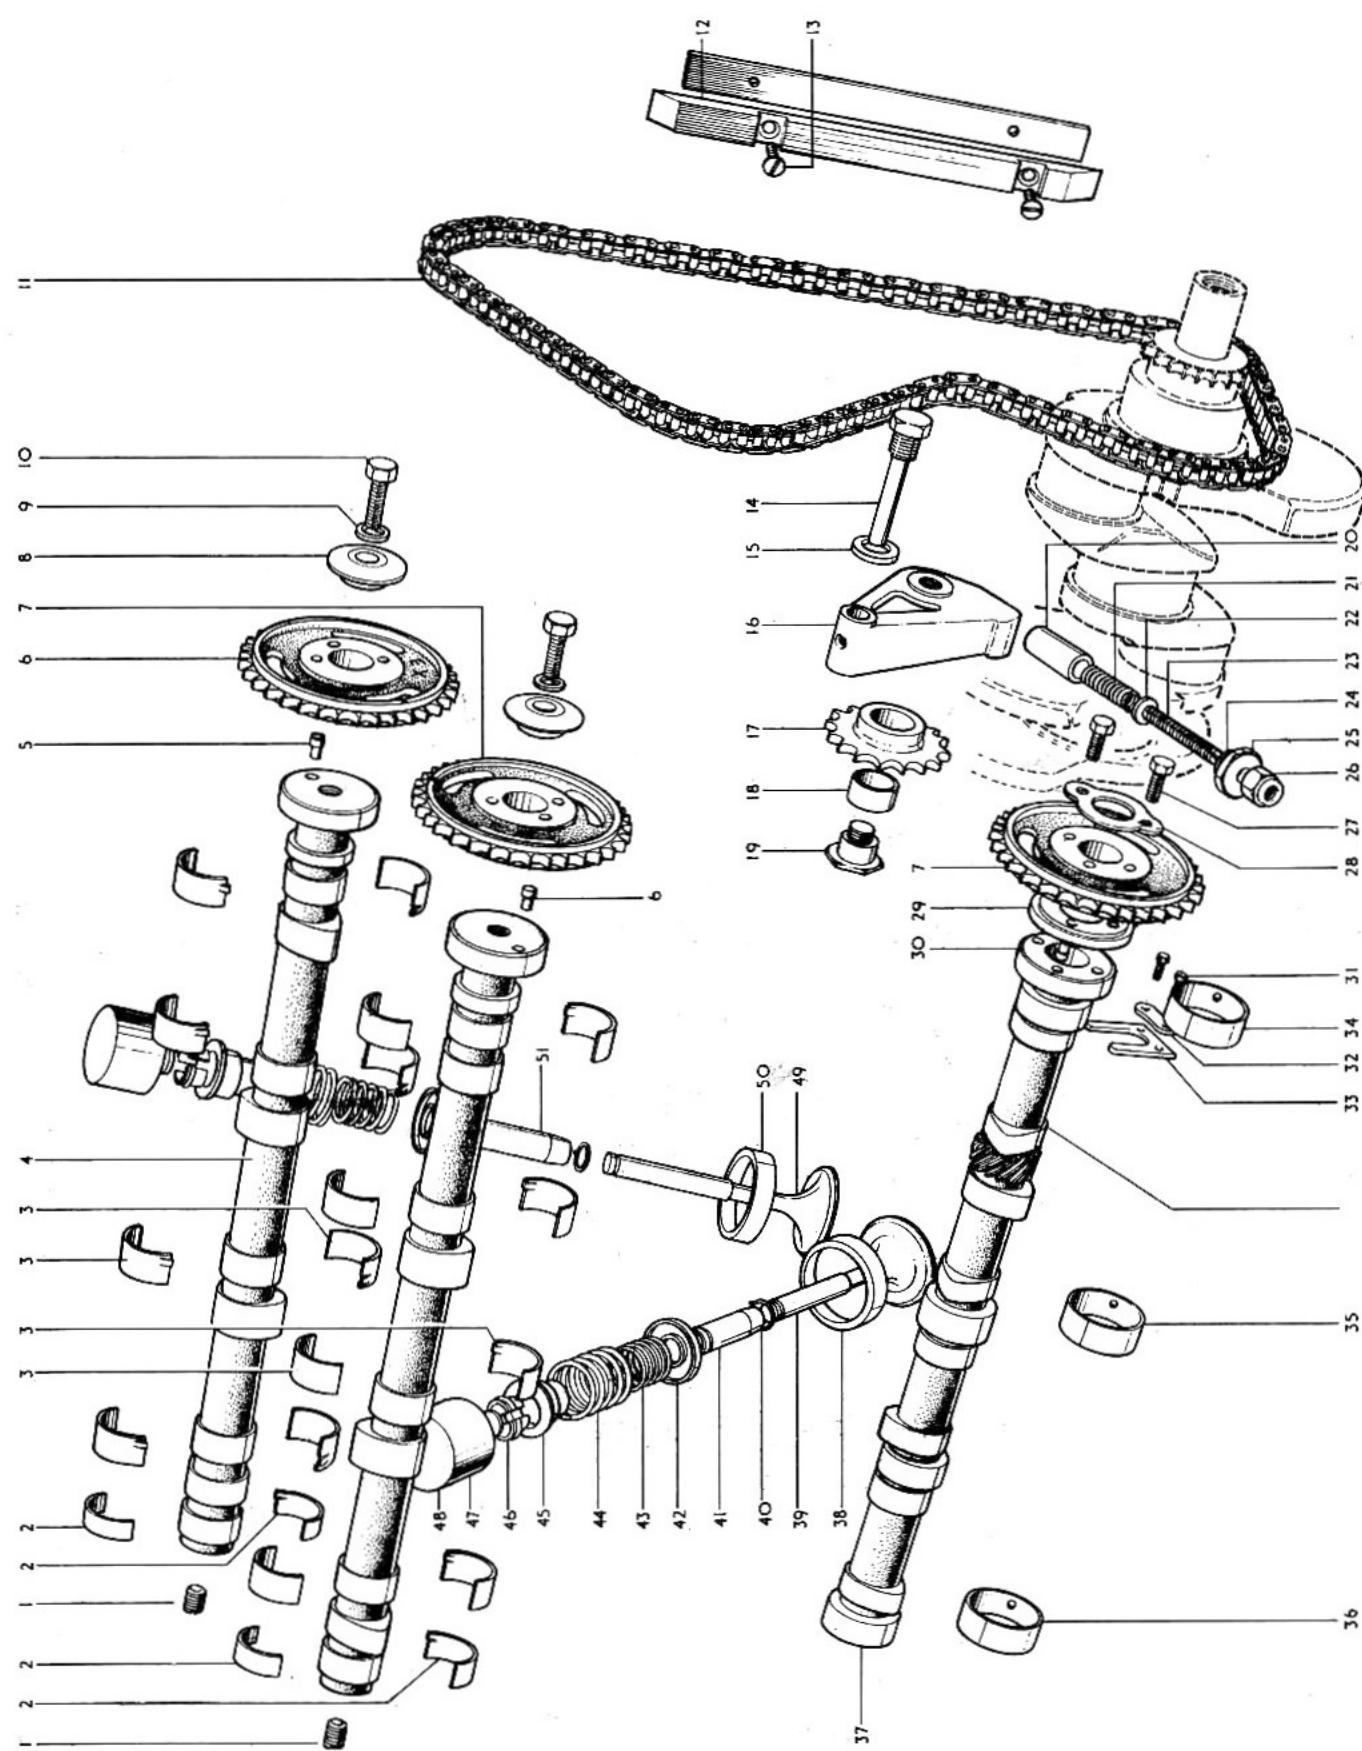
CAMSHAFT AND VALVE MECHANISM
